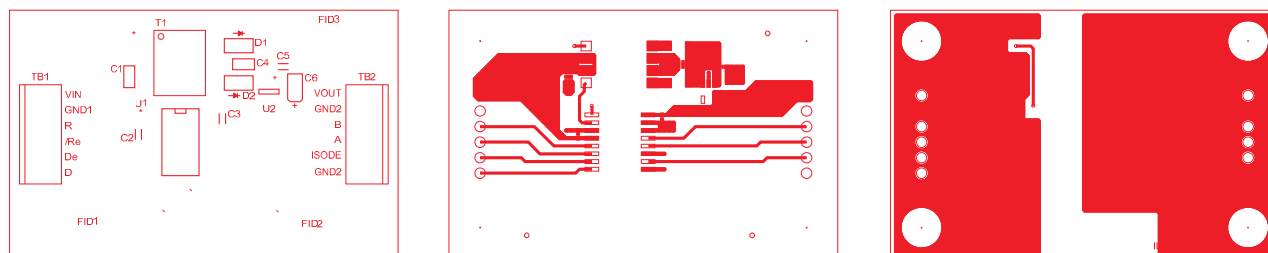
Board Layout: Silk Screen (Left), Top Layer (Middle), Bottom Layer (Right)
